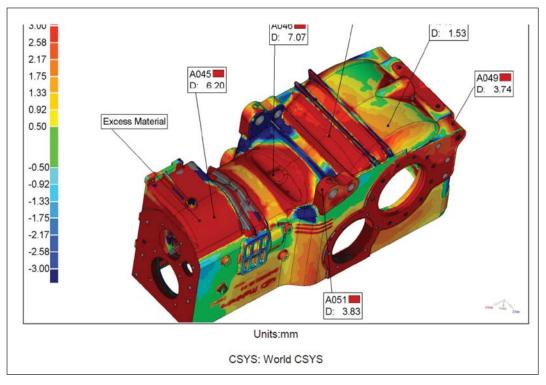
Scanned Casting superimposed with Casting 3D Model.
